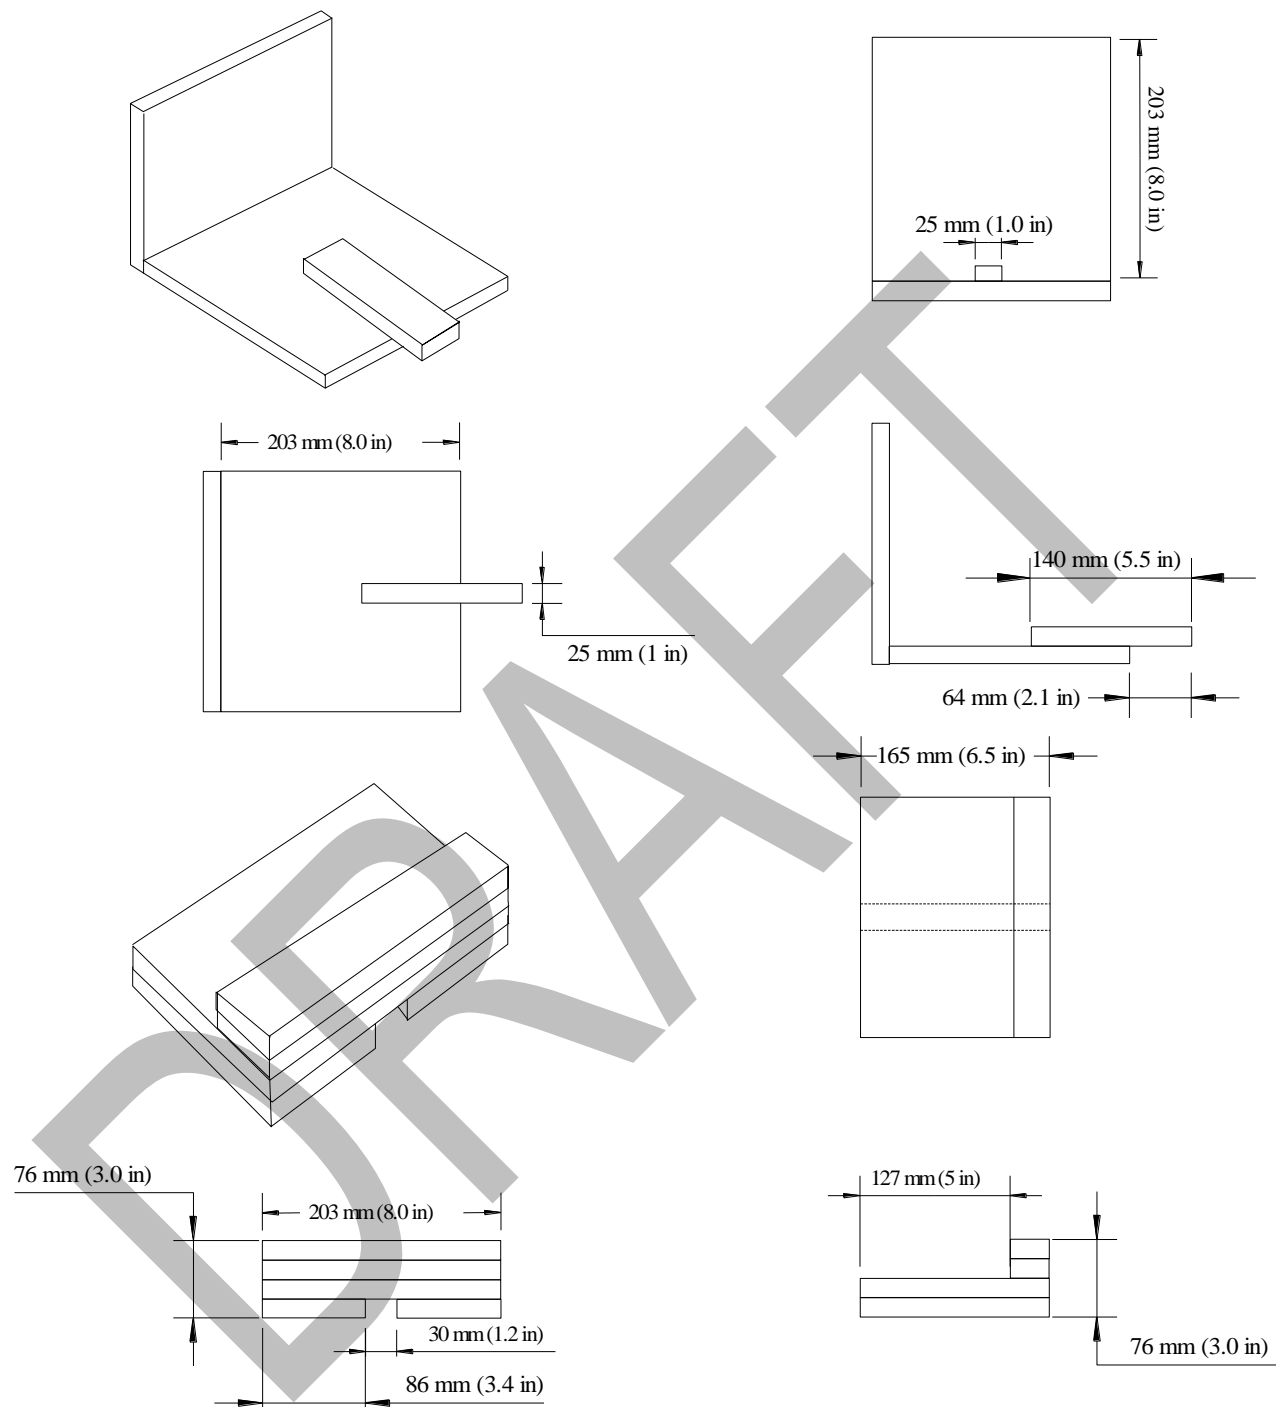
Specimen Holder for Mock-up Smoldering Ignition Resistance Tests
